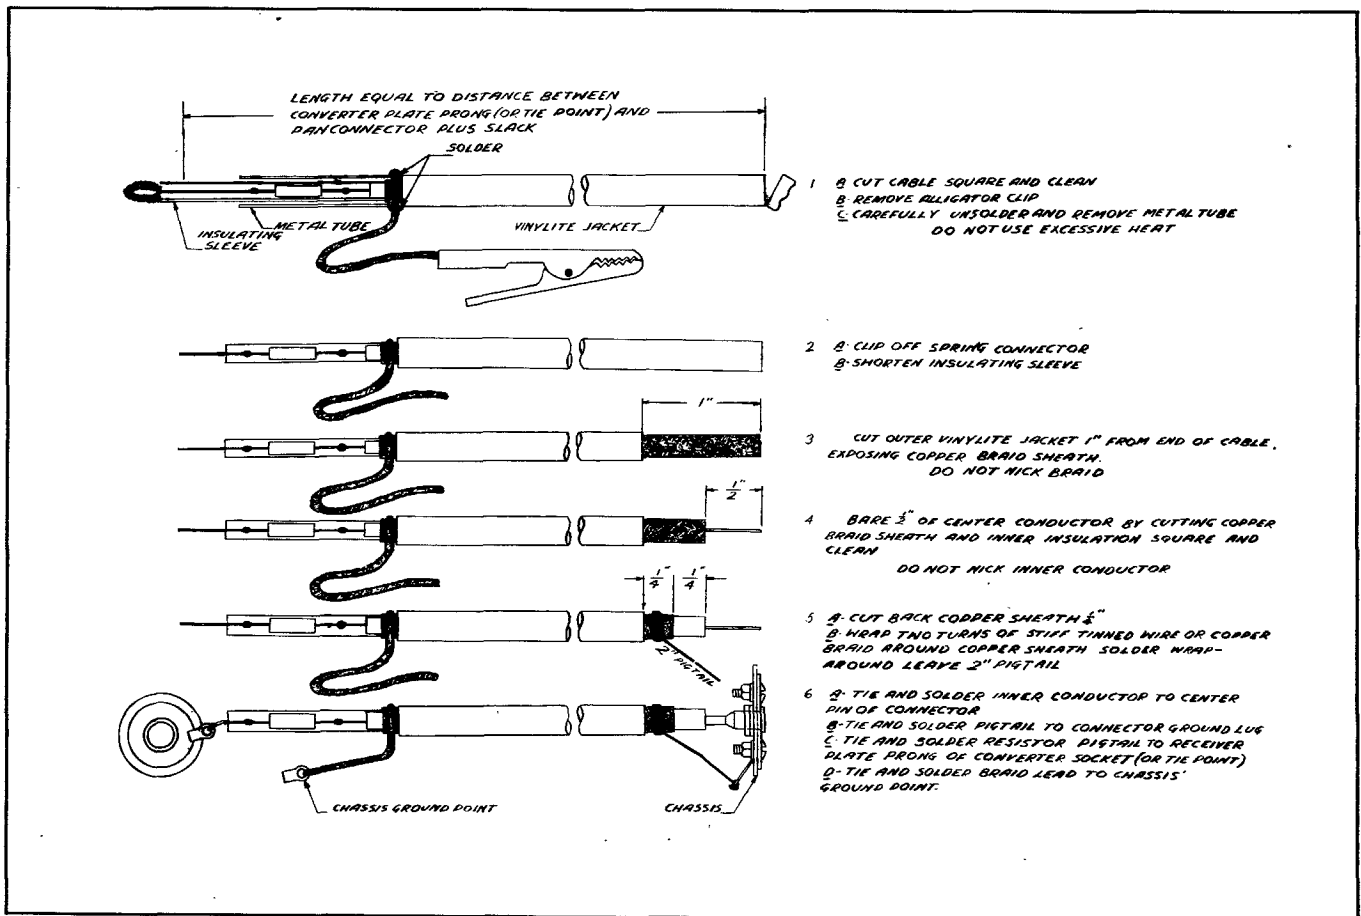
Cable Fabrication for Receivers Without a PAN Outlet.
